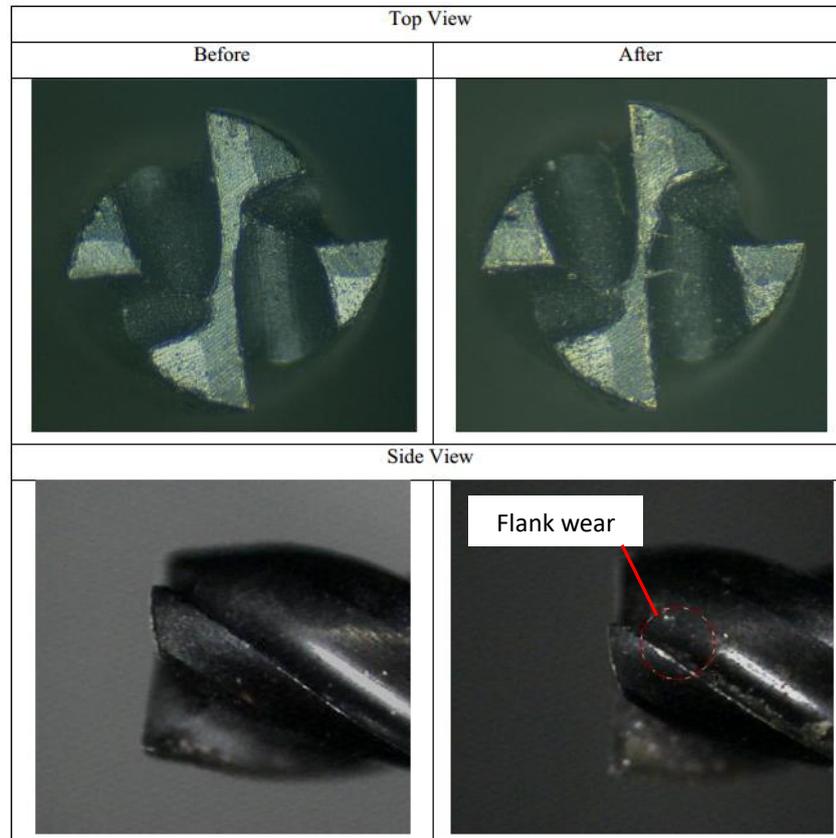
Tool geometry before and after 20.0 [mm] pass used
